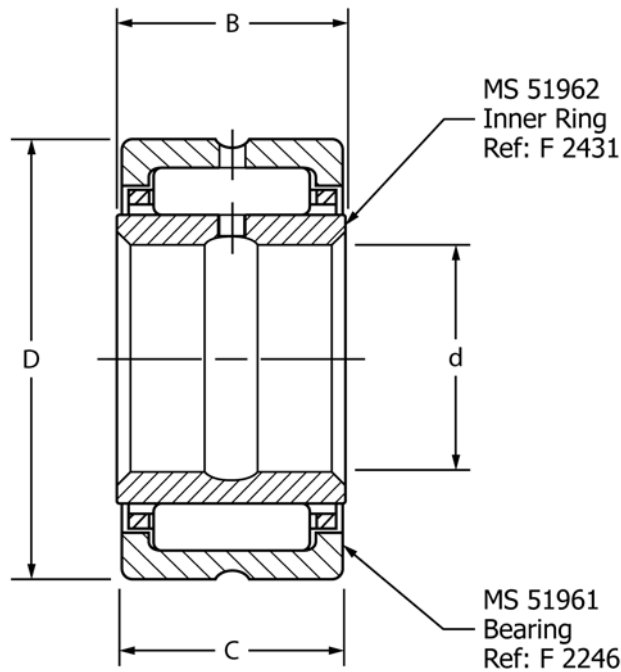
Schematic Drawing—Roller Bearing Assembly
